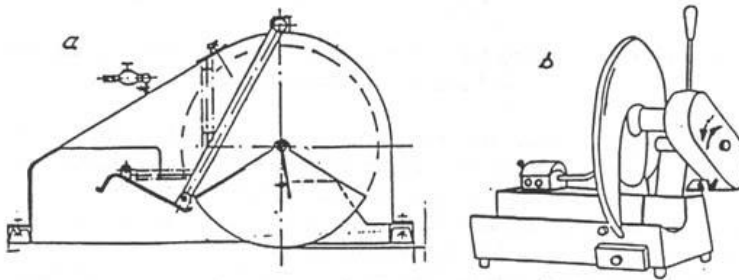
a. Deheading machine with a circular saw, operated manually (straight cut),
